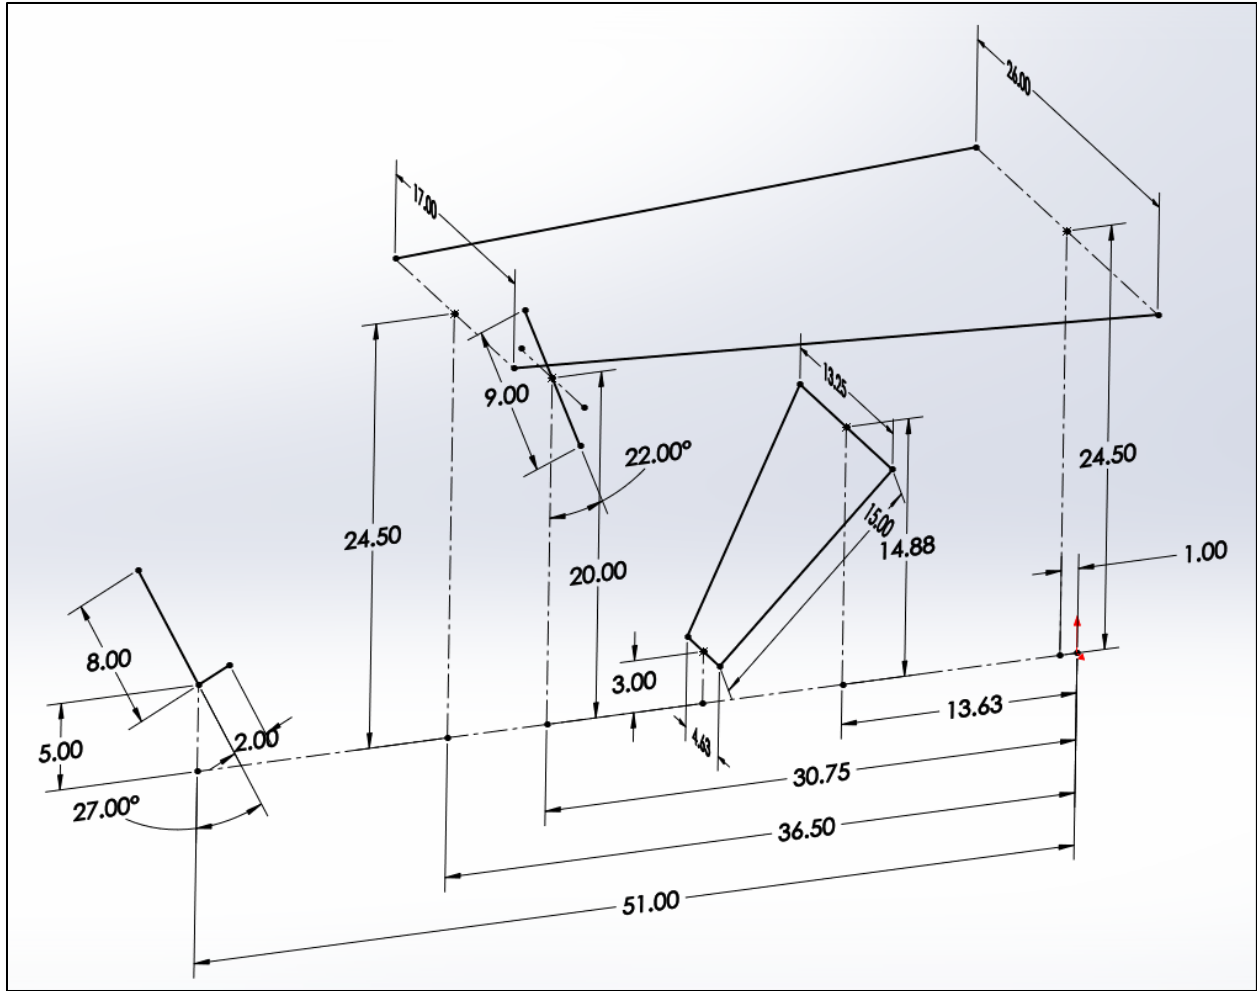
Dimensioned Sketch of Final Cockpit Mockup
